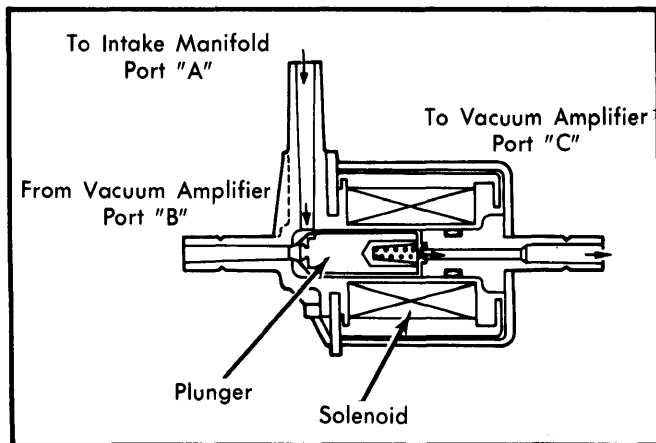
Exploded View of Calif. Auto. Trans. GLC No. 1 Three-Way Solenoid Valve
